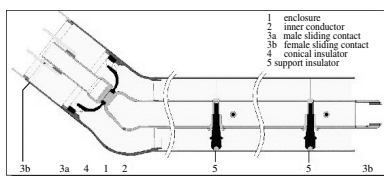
Straight construction unit with an angle element. (Courtesy of Siemens.)
